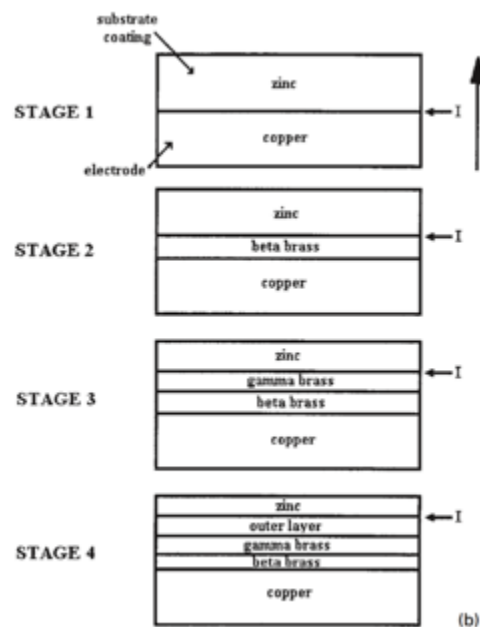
Alloy formation on the electrode when welding hot-dip zinc coated steel [44]
